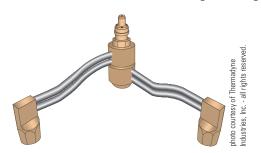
Slitting adaptor for cutting machine. It can be used for parallel cuts from 1 1/2 in. (38 mm) to 12 in. (500 mm). Ideal for cutting test coupons.
